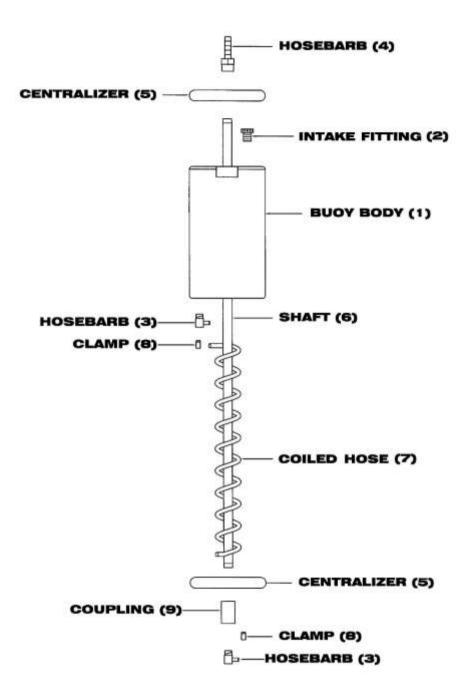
4" Heavy Oil Skimmer Assembly
